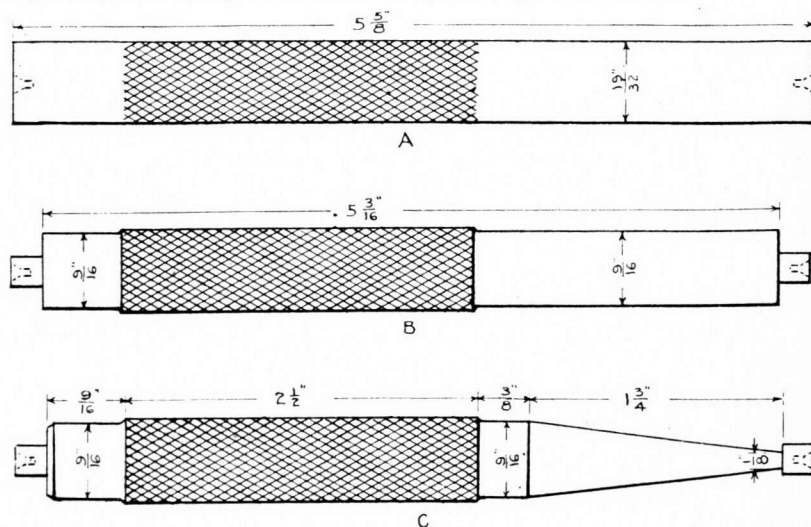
Center punch, stock $\frac{5}{8}$ -inch tool steel
